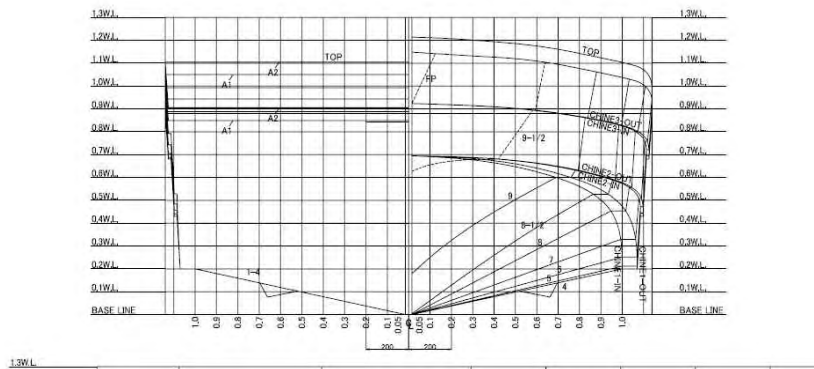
Body plan of 3 G/T fishing boat
